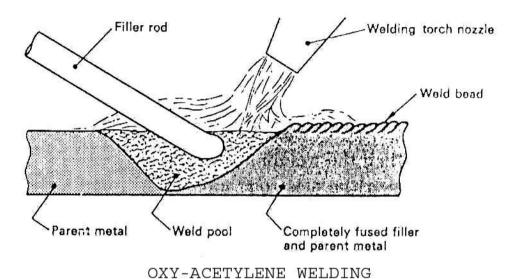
Elements involved in oxy-acetylene welding
